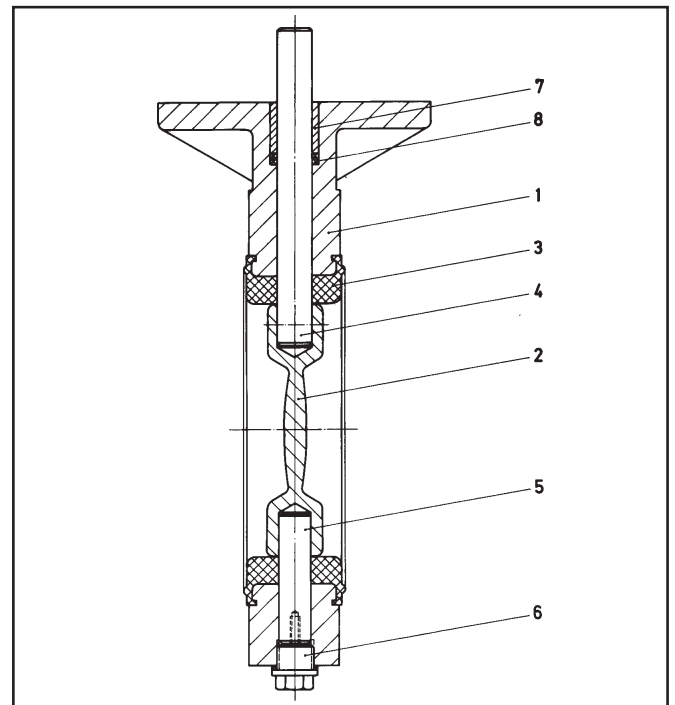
Sectional drawing of a valve series 17b -type WZ
